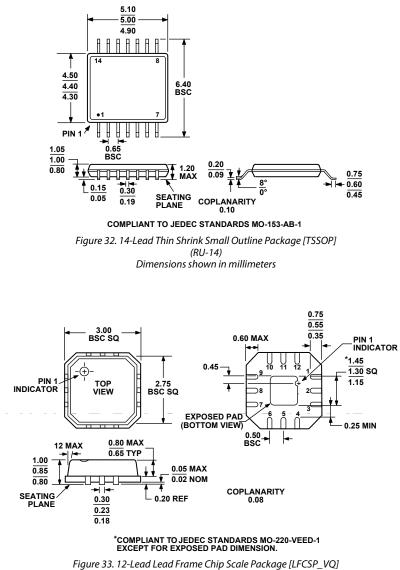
12-Lead Lead Frame Chip Scale Package [LFCSP\_VQ] 3 mm × 3 mm Body, Very Thin Quad (CP-12-1) Dimensions shown in millimeters
